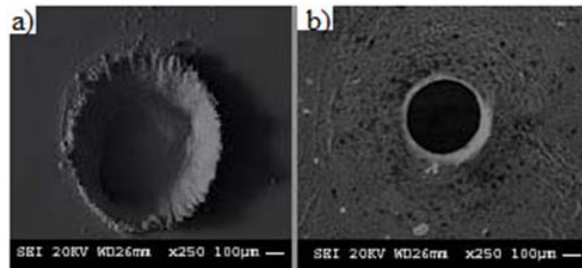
SEM image of the Titanium alloy (a) single electrical discharge machining (b) surface morphology
